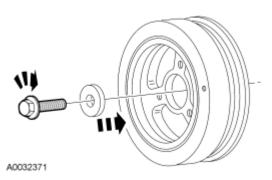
Installing Crankshaft Pulley Bolt & Washer Courtesy of FORD MOTOR CO.
